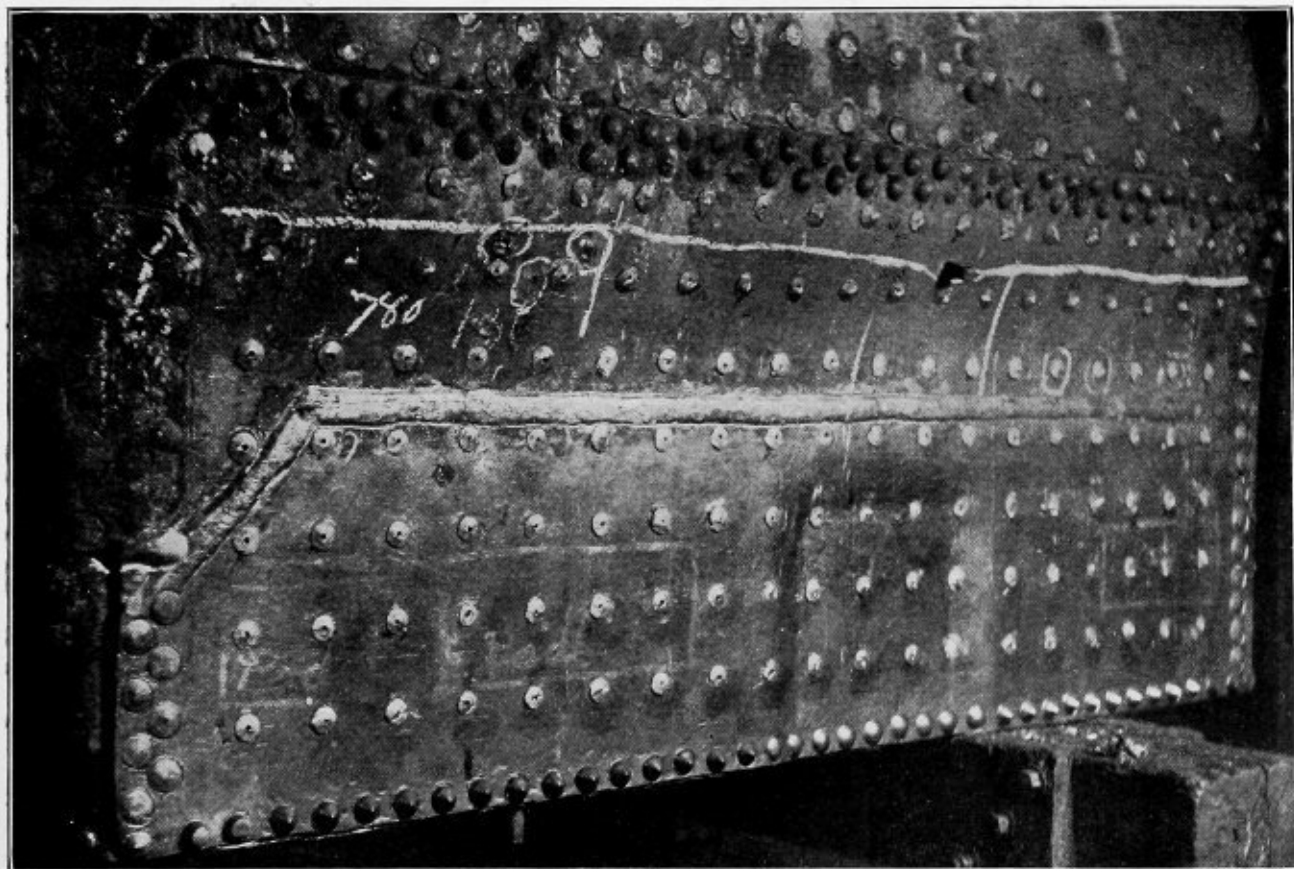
SIDE SHEET WELDED IN BY ELECTRICAL APPARATUS
